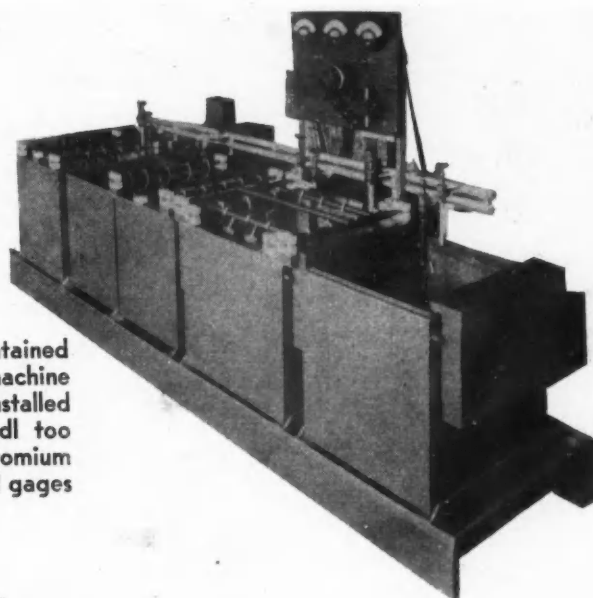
Self-contained electro-plating machine which can be installed in a centralized tool room for chromium plating tools and gages
